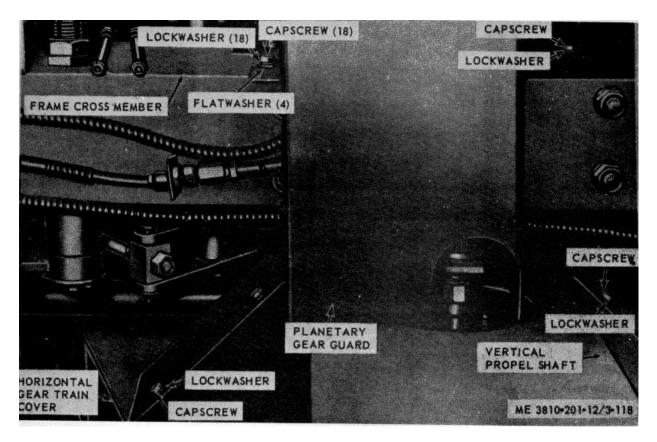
Vertical propel shaft guard, planetary gear guard, and horizontal gear train cover, removal and installation.
